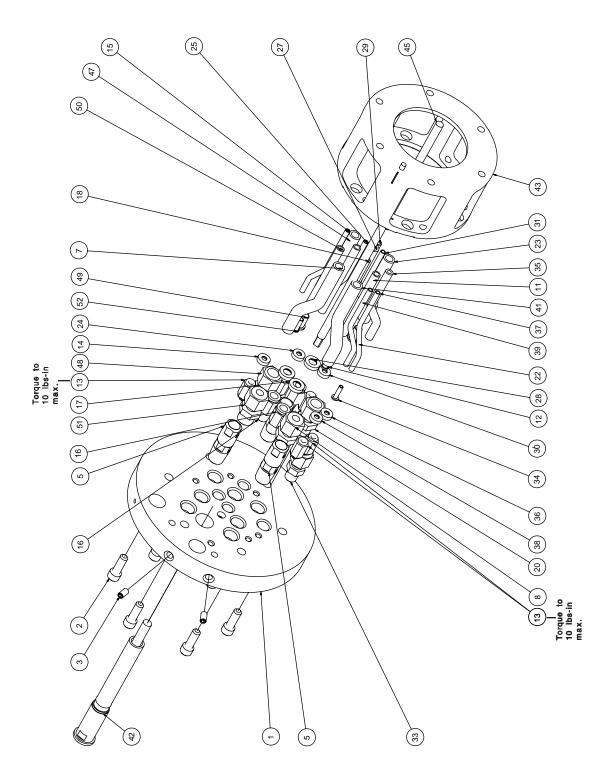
79106-XXXXXXX Tubing Bundle Assembly (English)
